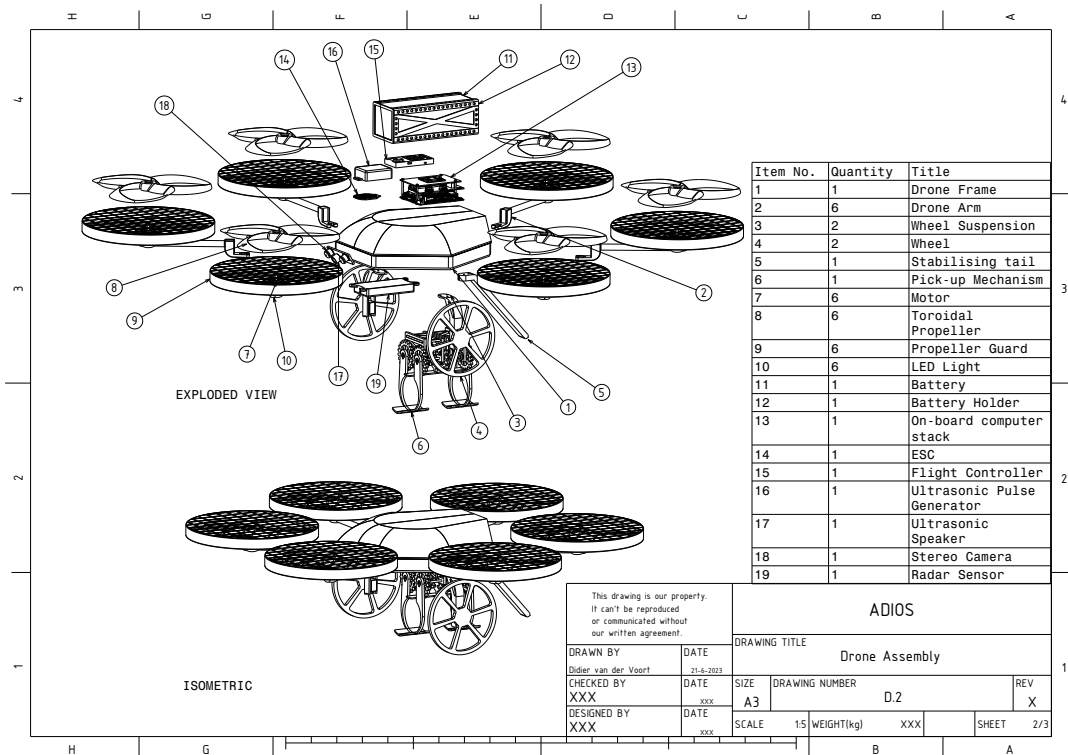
Technical drawing with an exploded view of the drone assembly made in 3DEXperience
